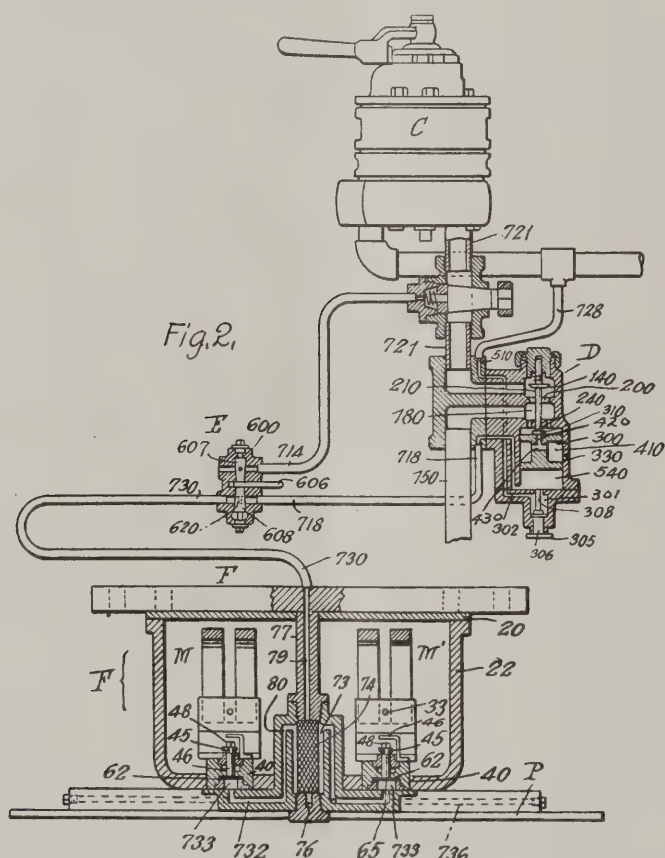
Diagrammatic Illustration of Magnet Control Valve Unit. Pneumatic Stop Valve and Release and Double Heading Cock
